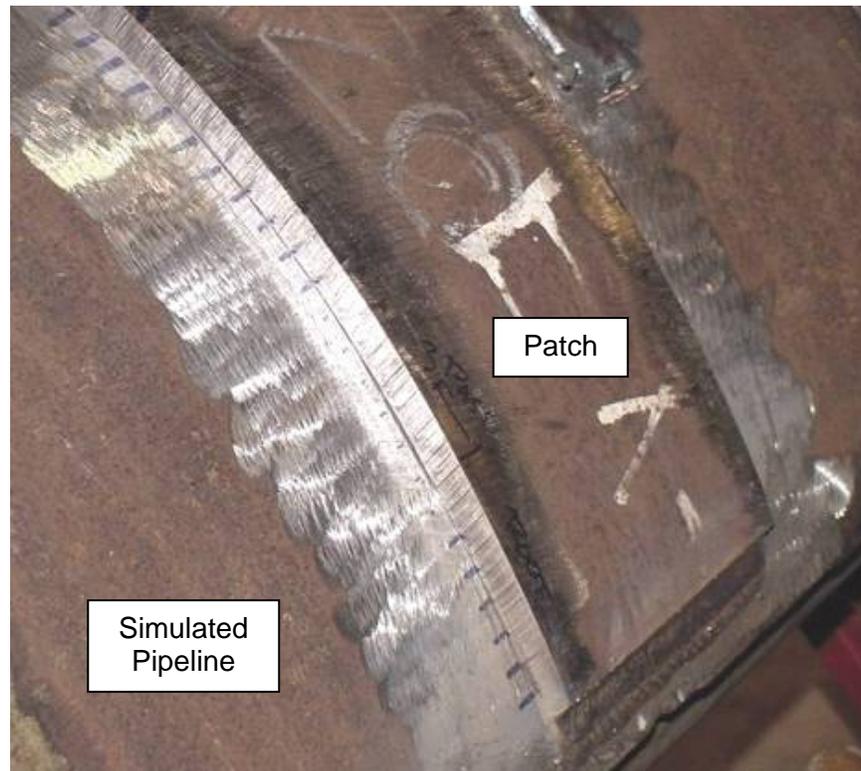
Typical Patch Tacked In Preparation for Fillet Welding
